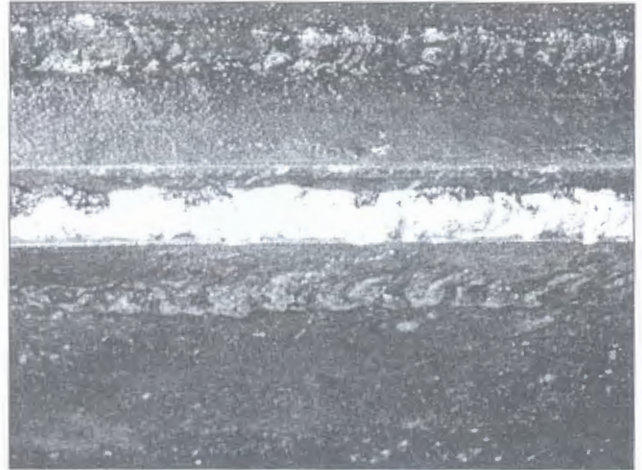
Appearance of three-layer weld made under water in the overhead position
